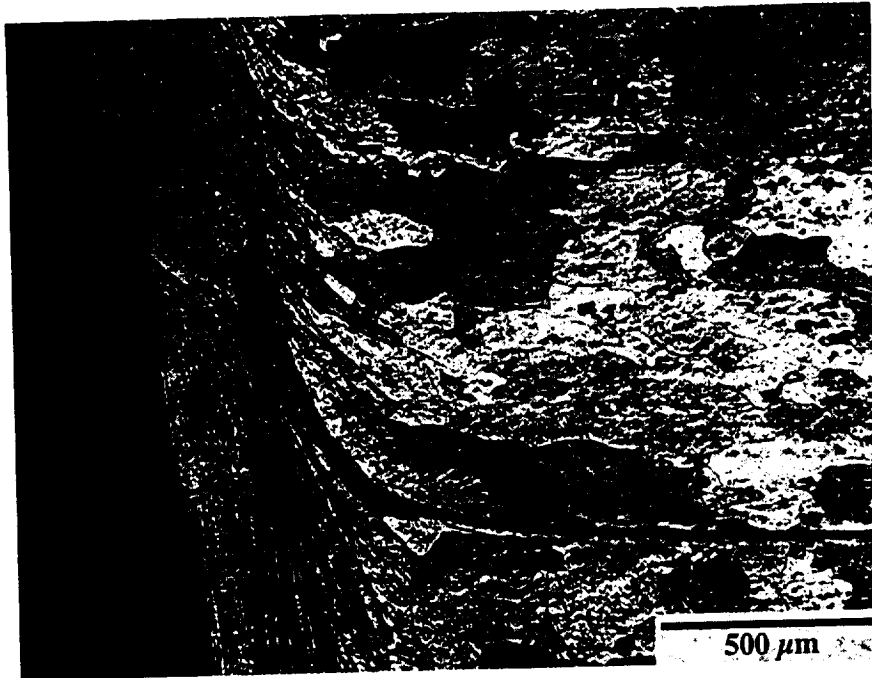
Enlarged view of a section of a Friction Stir Weld looking down from the crown on the leading side of the pin where metal is wiped onto the tool. A FSW weld in 0.317 inch thick 2219-T87 aluminum plate made at 220 RPM and 3.5 inches per minute travel speed was emergency-stopped, the tool unscrewed from the plate, and approximately 0.150 inches of metal removed from the crown side of the plate before polish and etch. The epoxy-mounting medium filling in the region formerly occupied by the FSW pin-tool exhibits bubbles (Nunes [63]).
